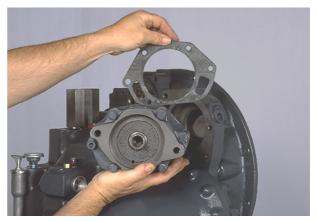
Remove pump mounting bolts and washers. Remove pump and gasket.
